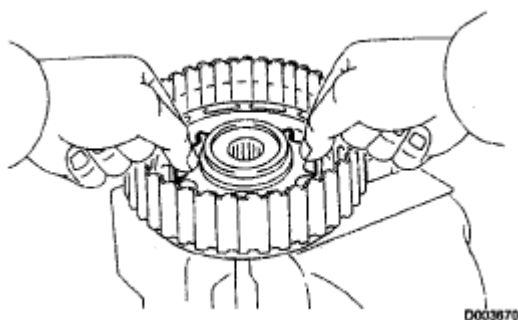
Installing Forward Clutch Piston To Clutch Drum
